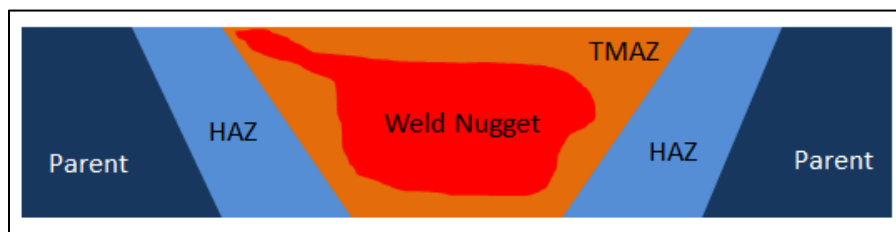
FSW diagram showing parent material, HAZ, TMAZ and weld nugget.
